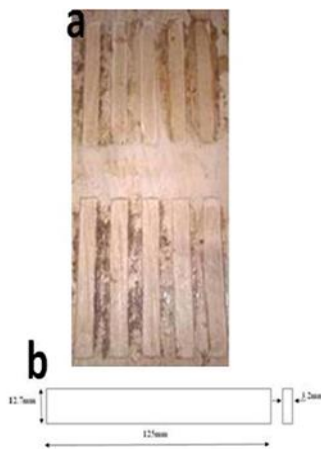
Flexural test and microscope examination specimens (a) Wooden mould (b) Dimensions.
